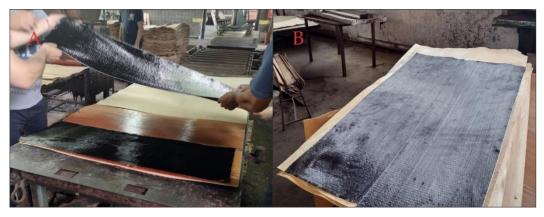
Veneer and carbon fiber fabric assembly in LVL construction: A - construction assembly of LVL glued with PF adhesive, B- construction assembly of LVL glued with PUR adhesive
